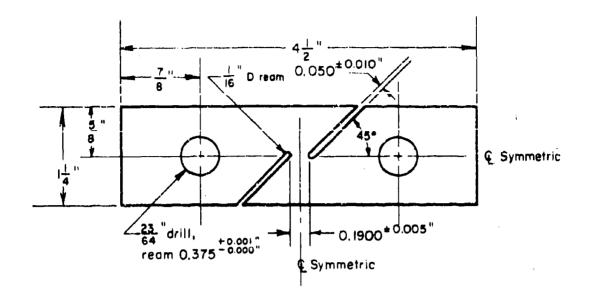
SHEET SHEAR TEST SPECIMEN
